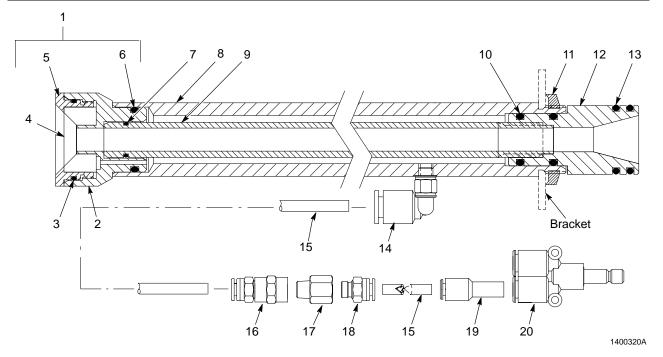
O-Ring Fit Fluidizing Pickup Tube Kit
